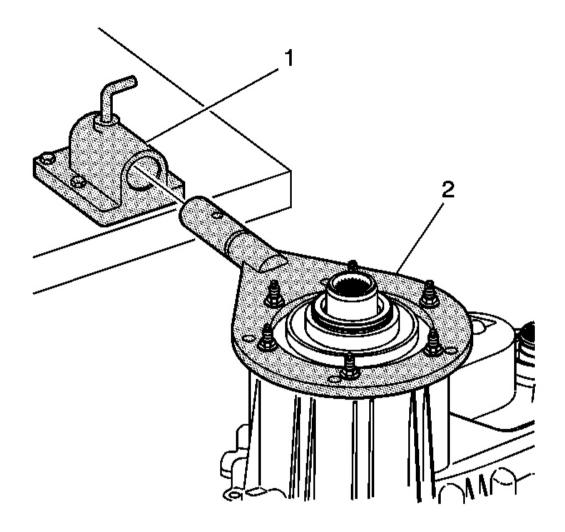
View Of J 45759 & J 3289-20 Courtesy of GENERAL MOTORS CORP.
